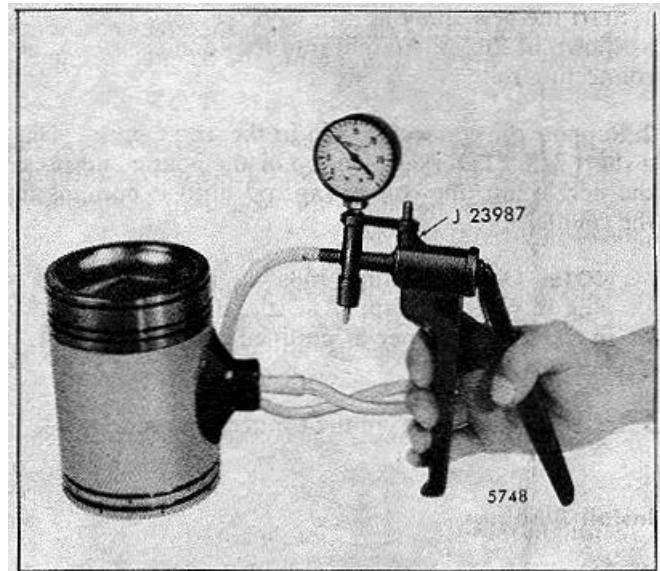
Checking Piston Pin Retainer for Proper Sealing
